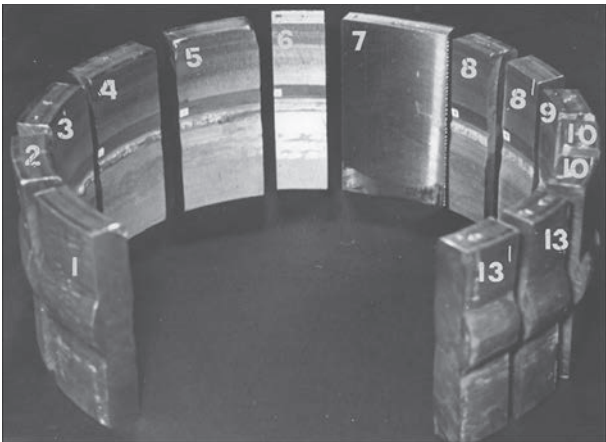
General appearance of a ring with a weld, cut into templates
